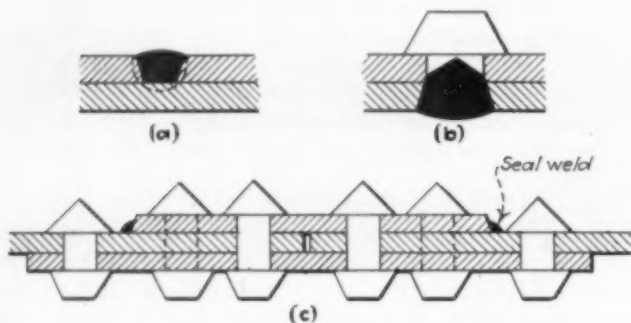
Plug and calking welds: (a) simple plug weld for attachment of wide bars or sheets; (b) calking a loose rivet; (c) weld for calking a seam; such a weld becomes a structural element contrary to usual belief
